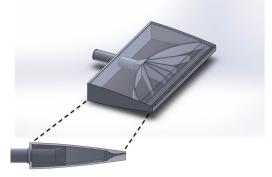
Trimetric and side view of the CAD Design - VII.
